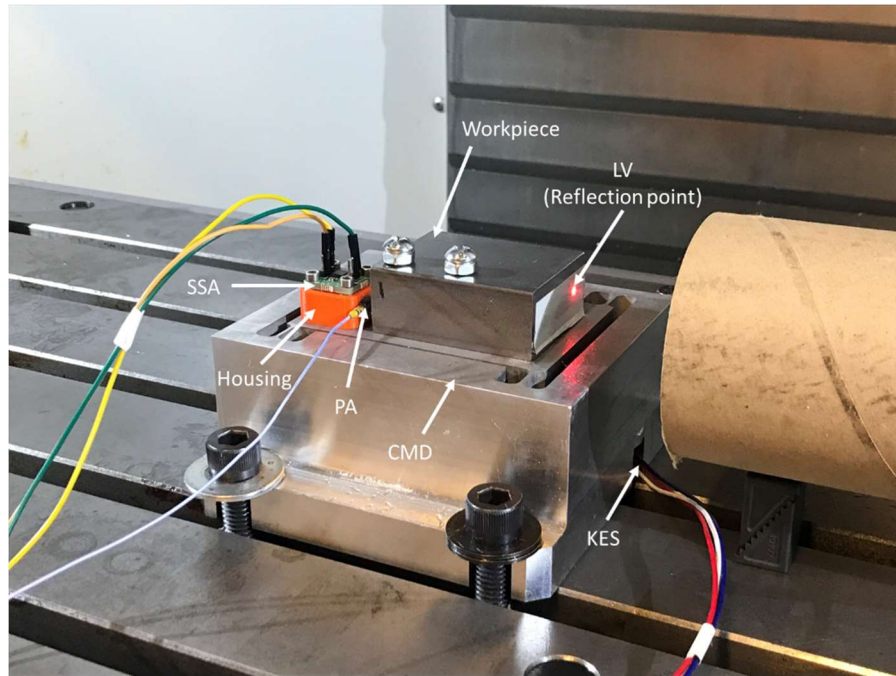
Setup of the CMD, showing the workpiece, housing, SSA, PA, LV (reflection point), and the KES.
